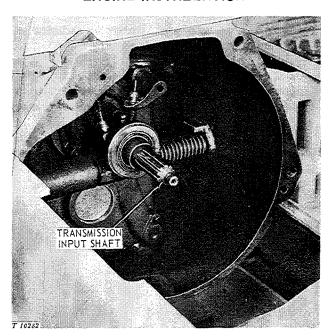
Transmission Drive Shaft Indexing Point
